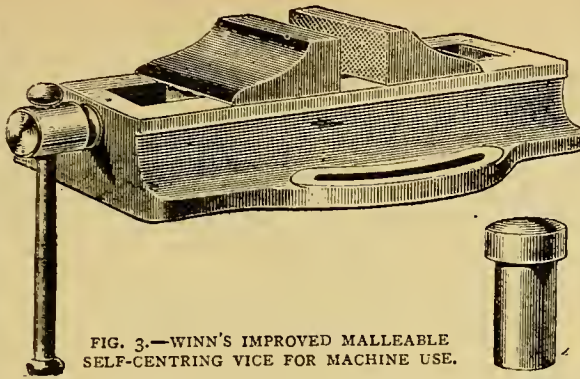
WINN'S IMPROVED MALLEABLE SELF-CENTRING VICE FOR MACHINE USE.
